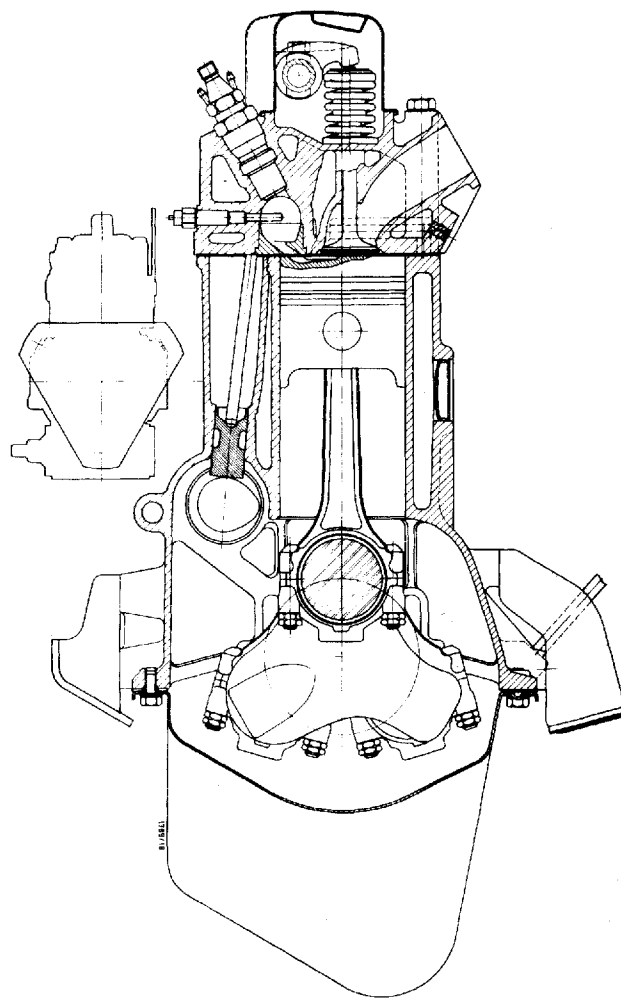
Cross section 3.6 litre diesel engine showing combustion system
